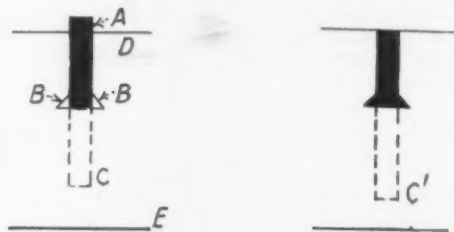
In the First View, the Cross Piece A C Projects Above the Stringer D E. On being forced down so that A is level with D (second view) the metal in the lower part of the black area shown in the cross piece is forced into the dovetail cuts B B in the slot in the stringer. The bottom of the cross piece C naturally goes to C', this movement being equal to the initial projection of A above D. This makes a thoroughly rigid connection without rivets or welding and is done cold on a hydraulic press
